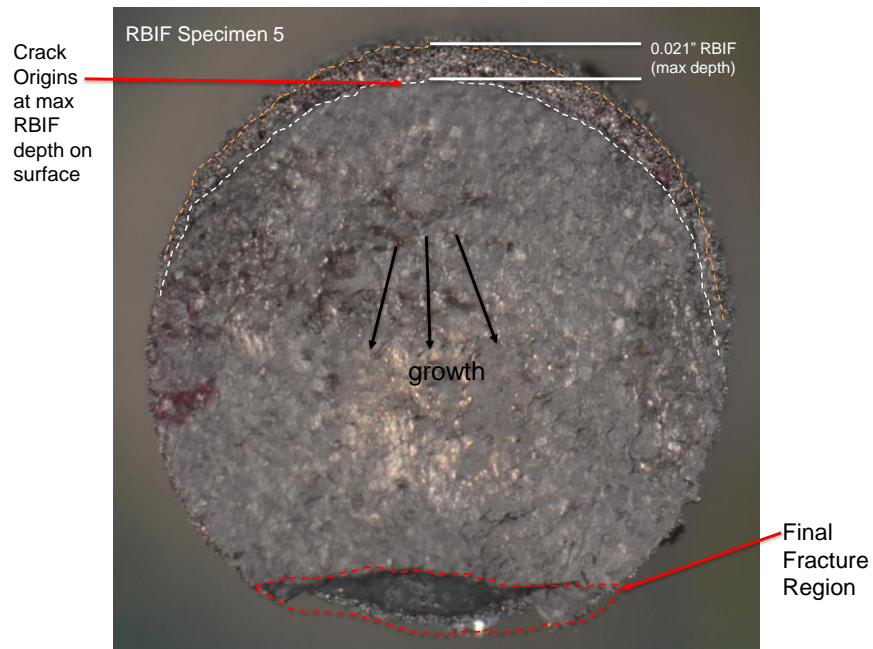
Fracture Surface Photograph of RBIF Specimens 5 ~10X Magnification
